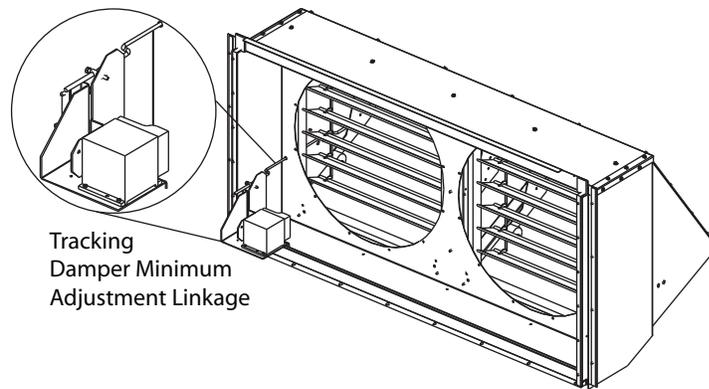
(Horizontal) Tracking Exhaust Damper Adjustment
